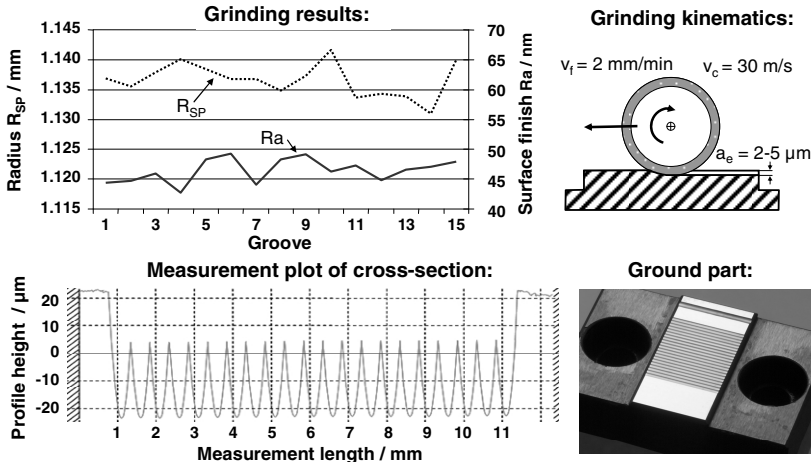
Precision grinding of cemented carbide tool insert, [Kli09]
